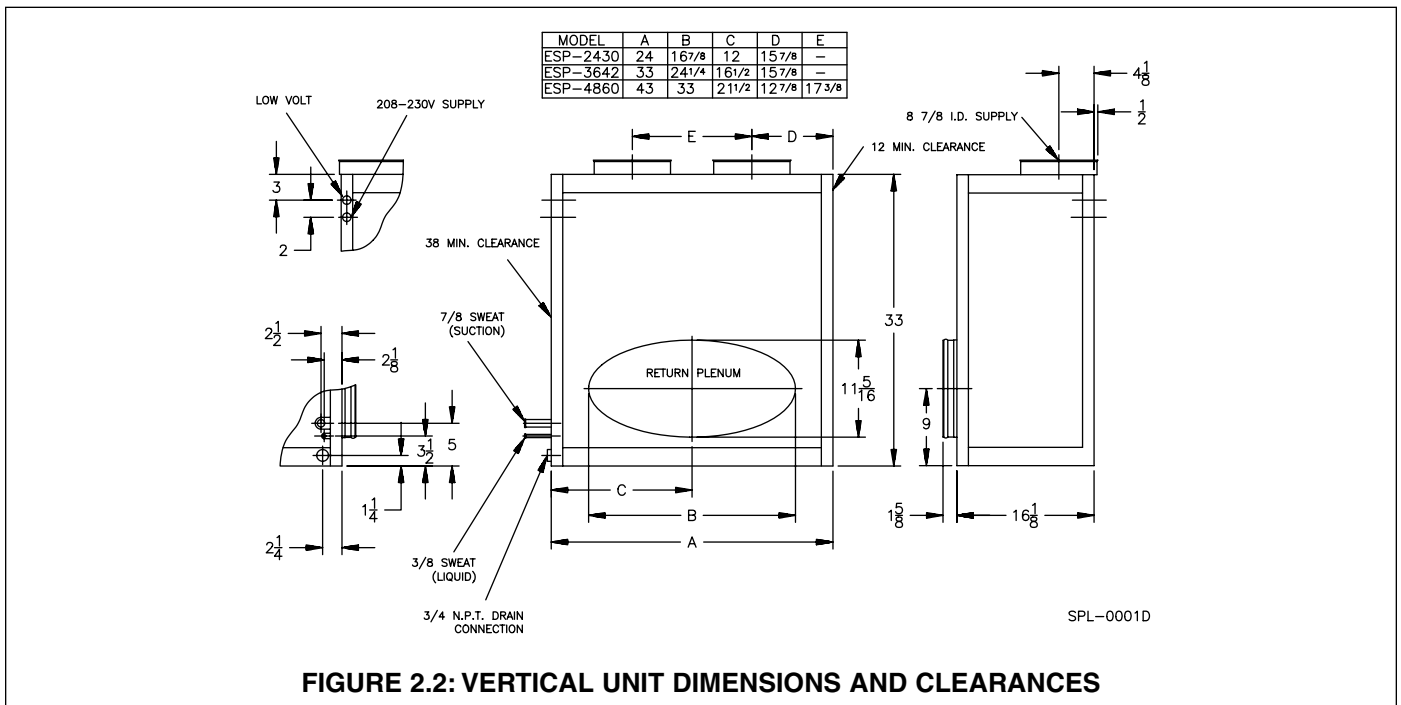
VERTICAL UNIT DIMENSIONS AND CLEARANCES
